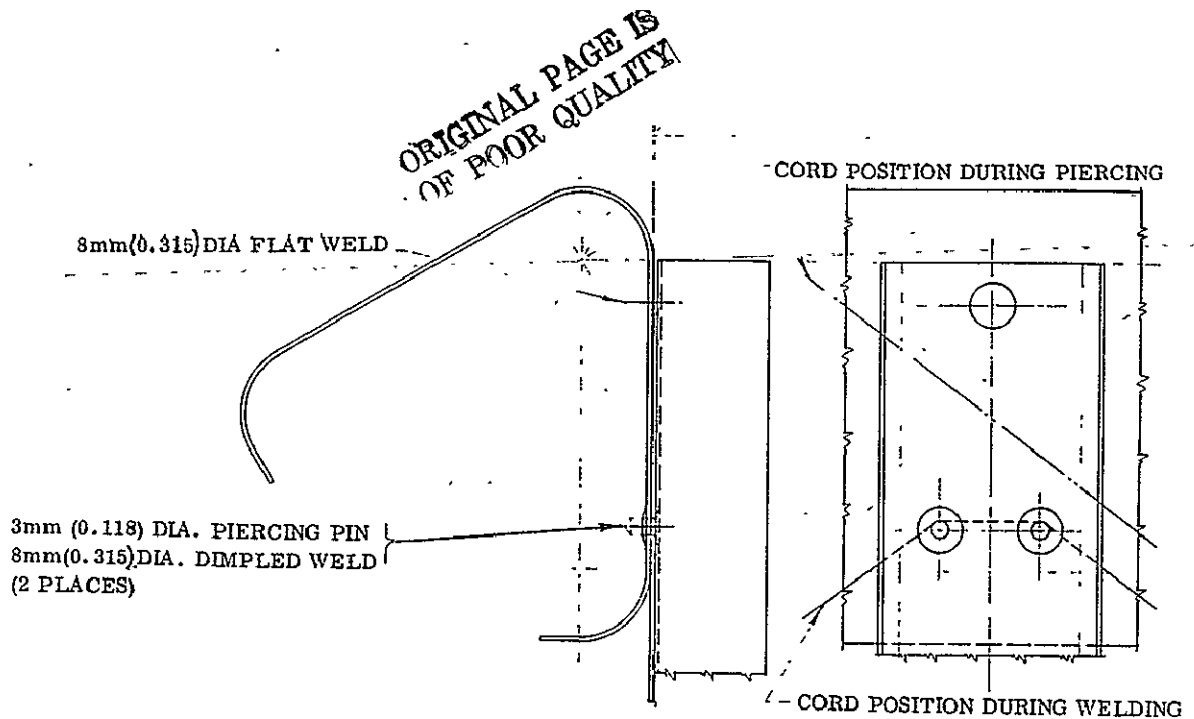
Cap/Cross Member/Diagonal Cord Welded Joint.
